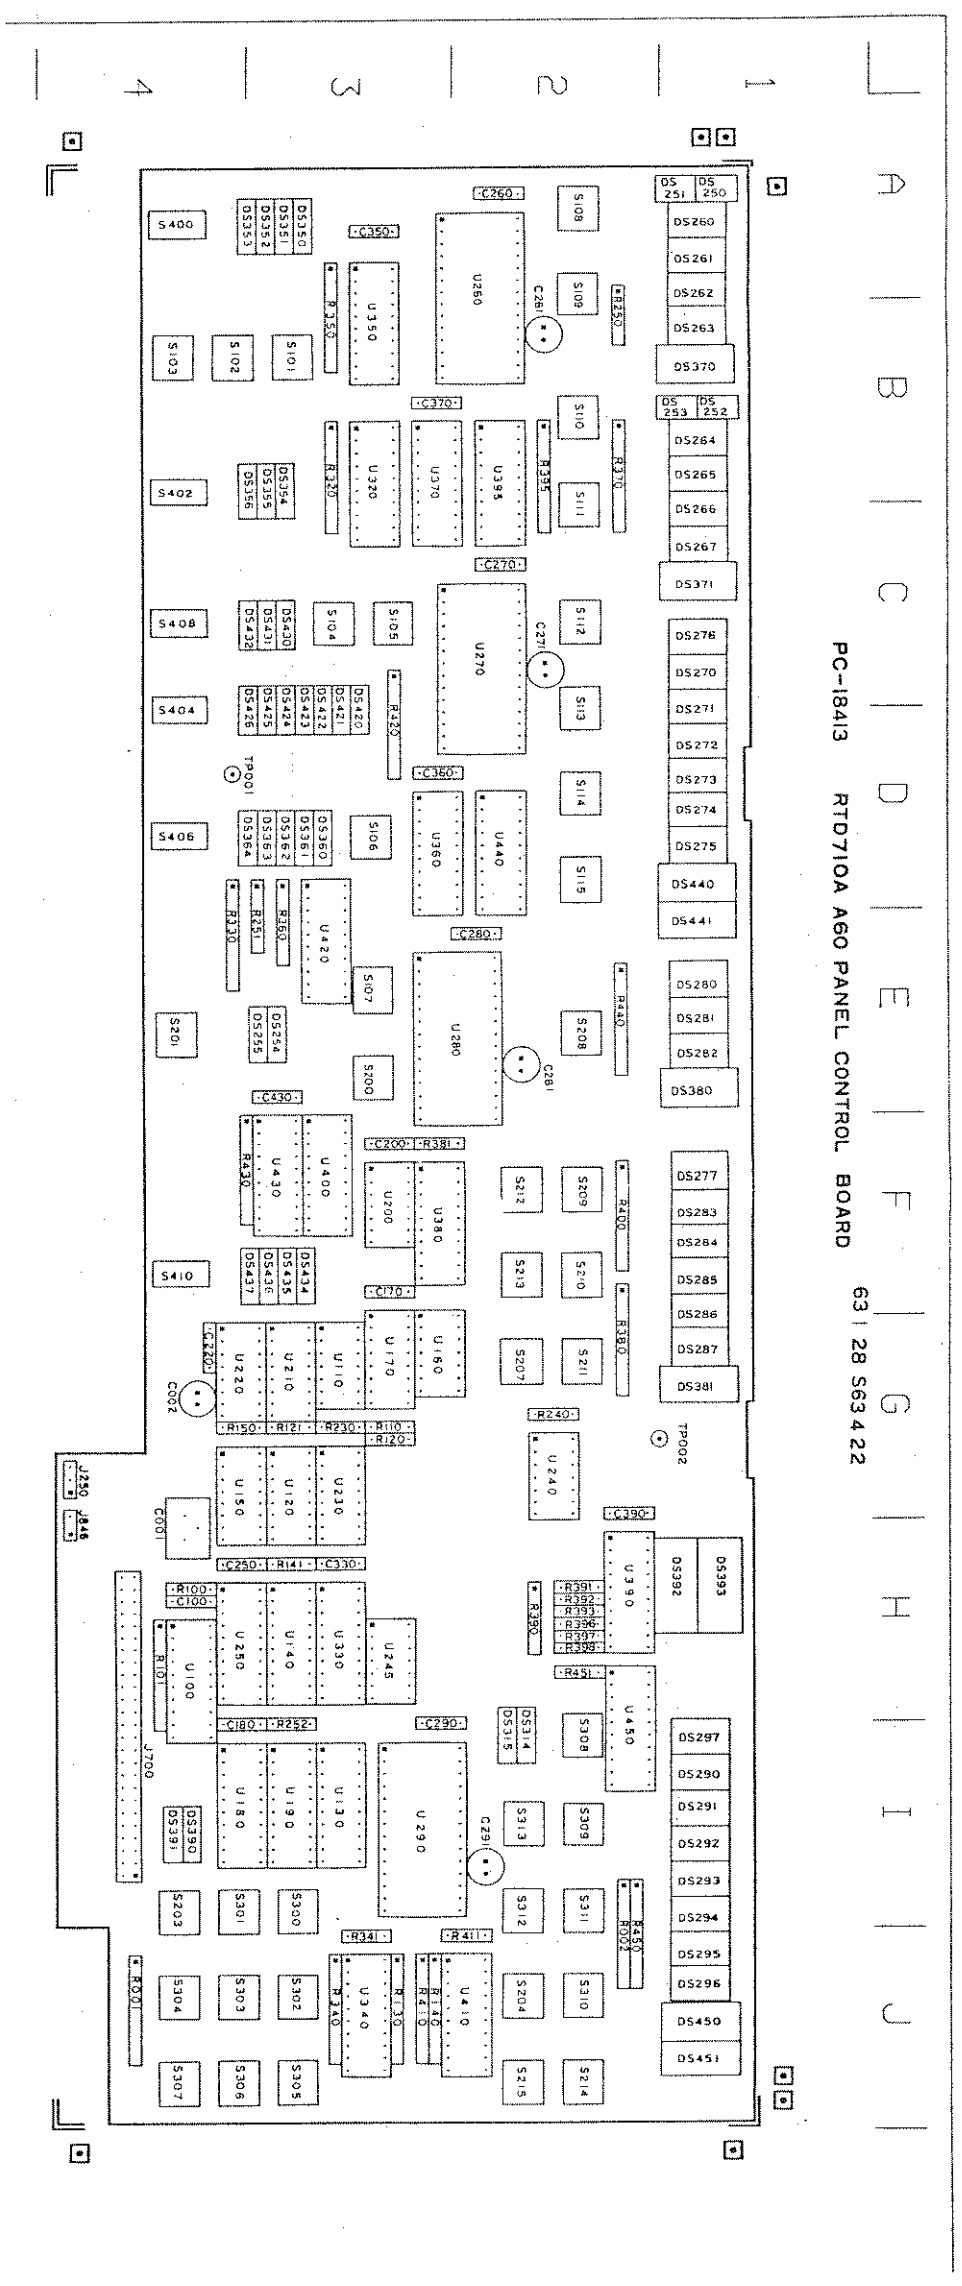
A60 PANEL CONTROL BD., CIRCUIT BD. ASS.
